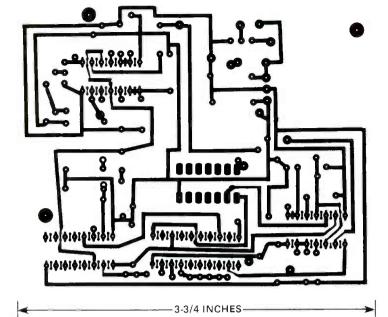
HERE'S A FOIL PATTERN you can use if you wish to build the project on a PC board. Note, however, that almost any construction technique can be used.
